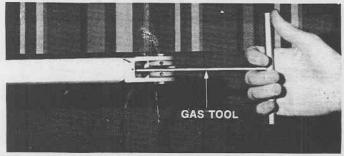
ADJUSTING PRESSURE ON GAS SPRING
